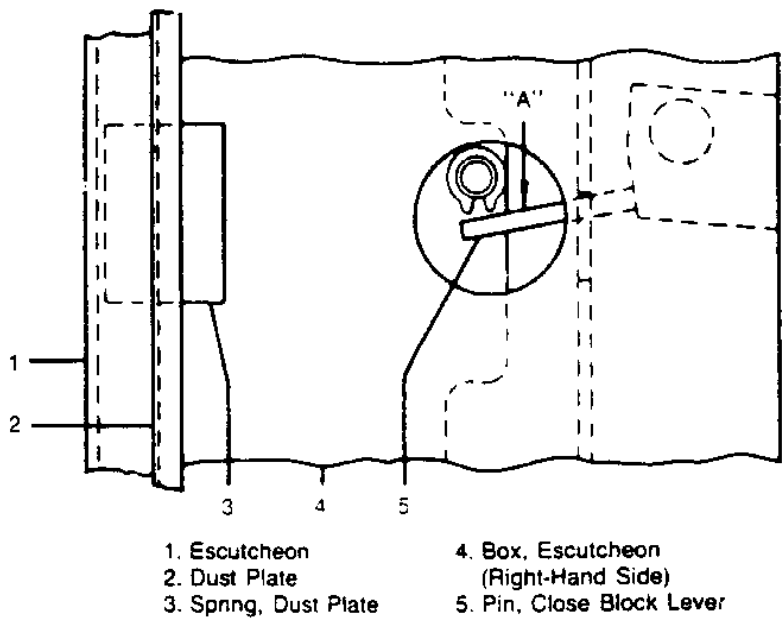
Partial View of Escutcheon Assembly (Right-Hand Side) Showing Slow Close Lever for Electrically Operated Circuit Breakers
